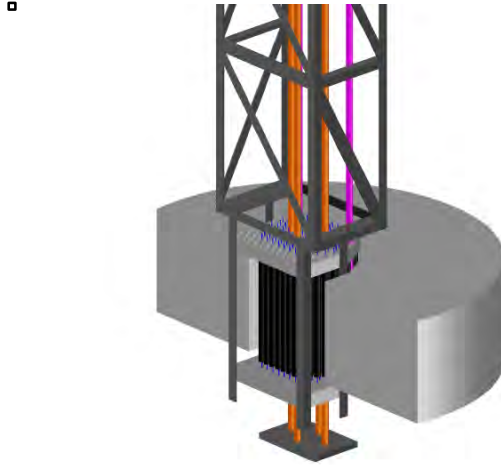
PSBR 3D AutoCAD® drawing of the new core-moderator assembly and tower design.
